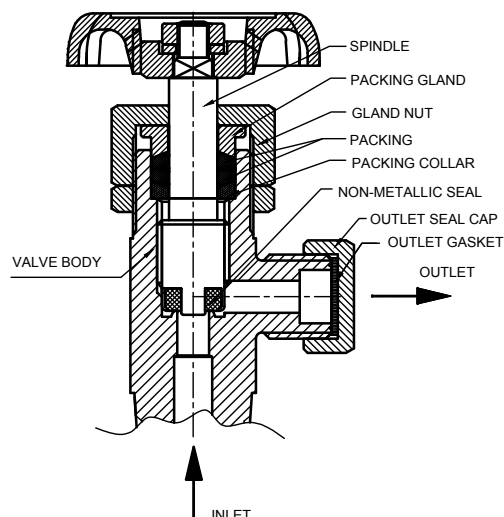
ILLUSTRATION OF COMPRESSION PACKED GLAND SEAL VALVE, NON-METALLIC SEAL (WHEEL OPERATED)
